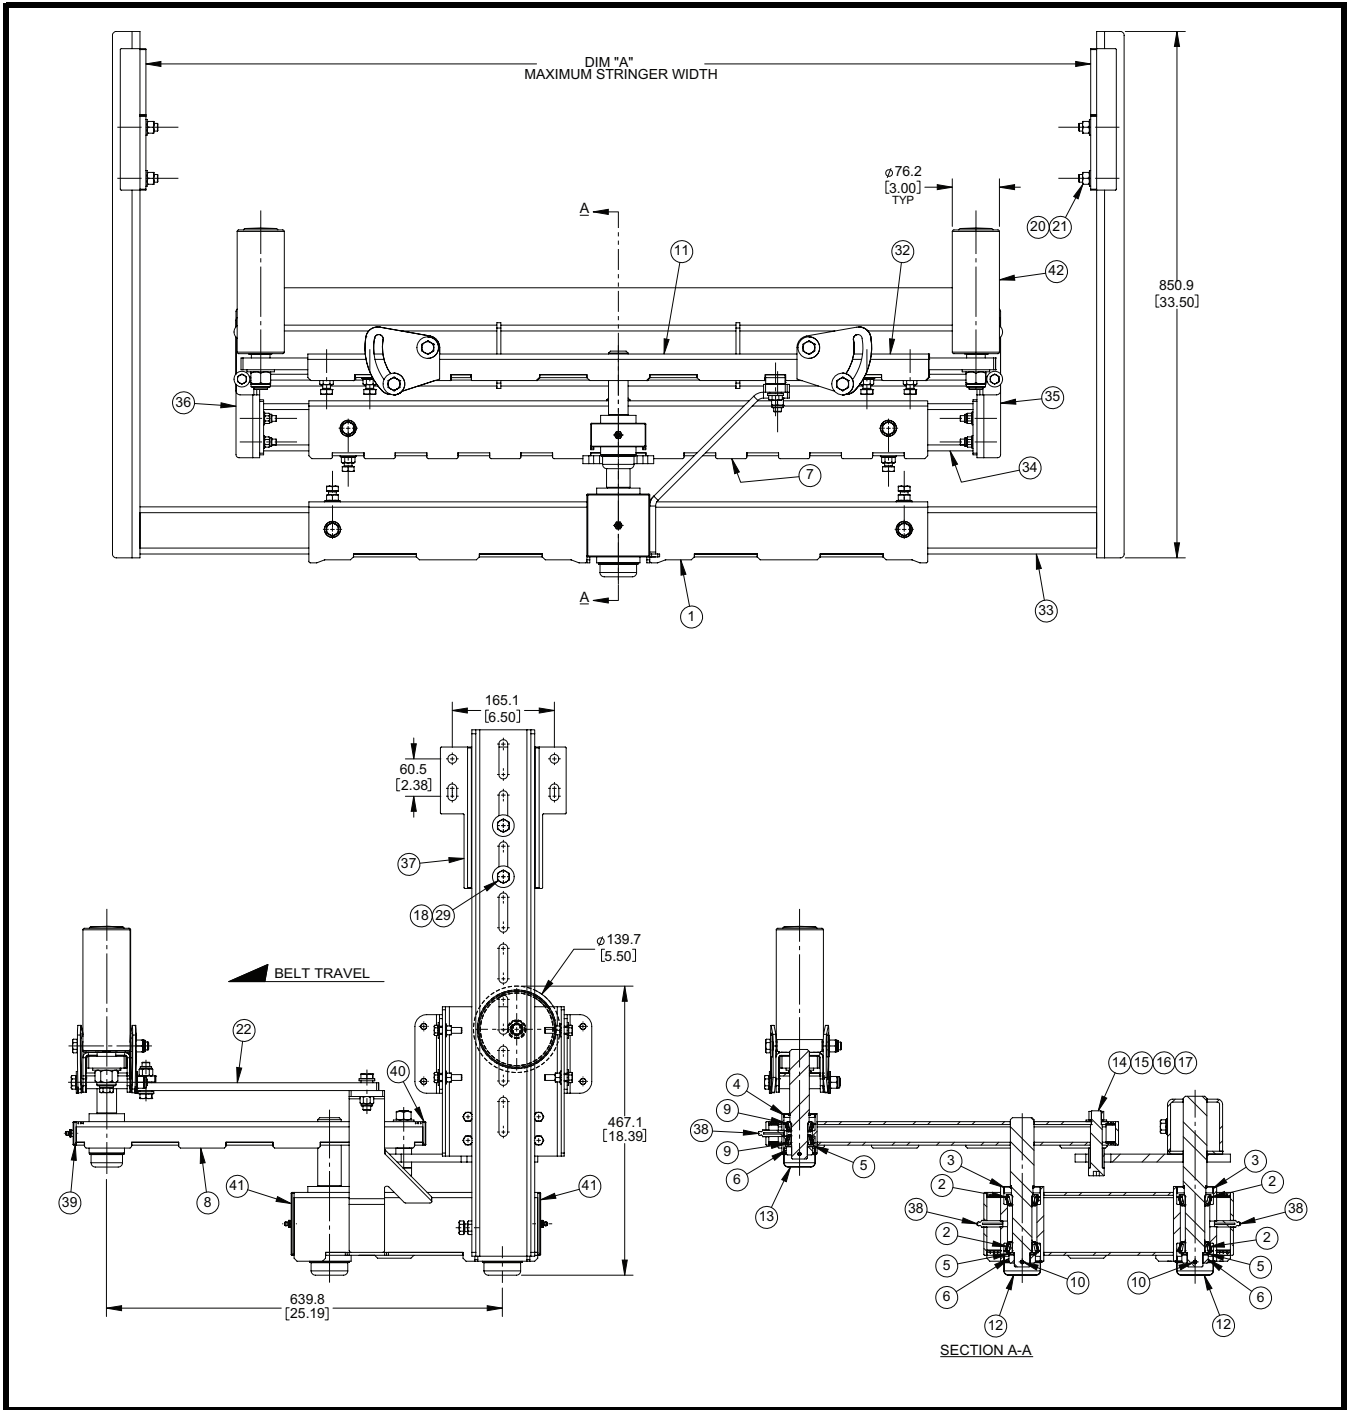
Martin® Tracker™ HD, P/N CTMHLXXXXXX (Sheet 1 of 2)
